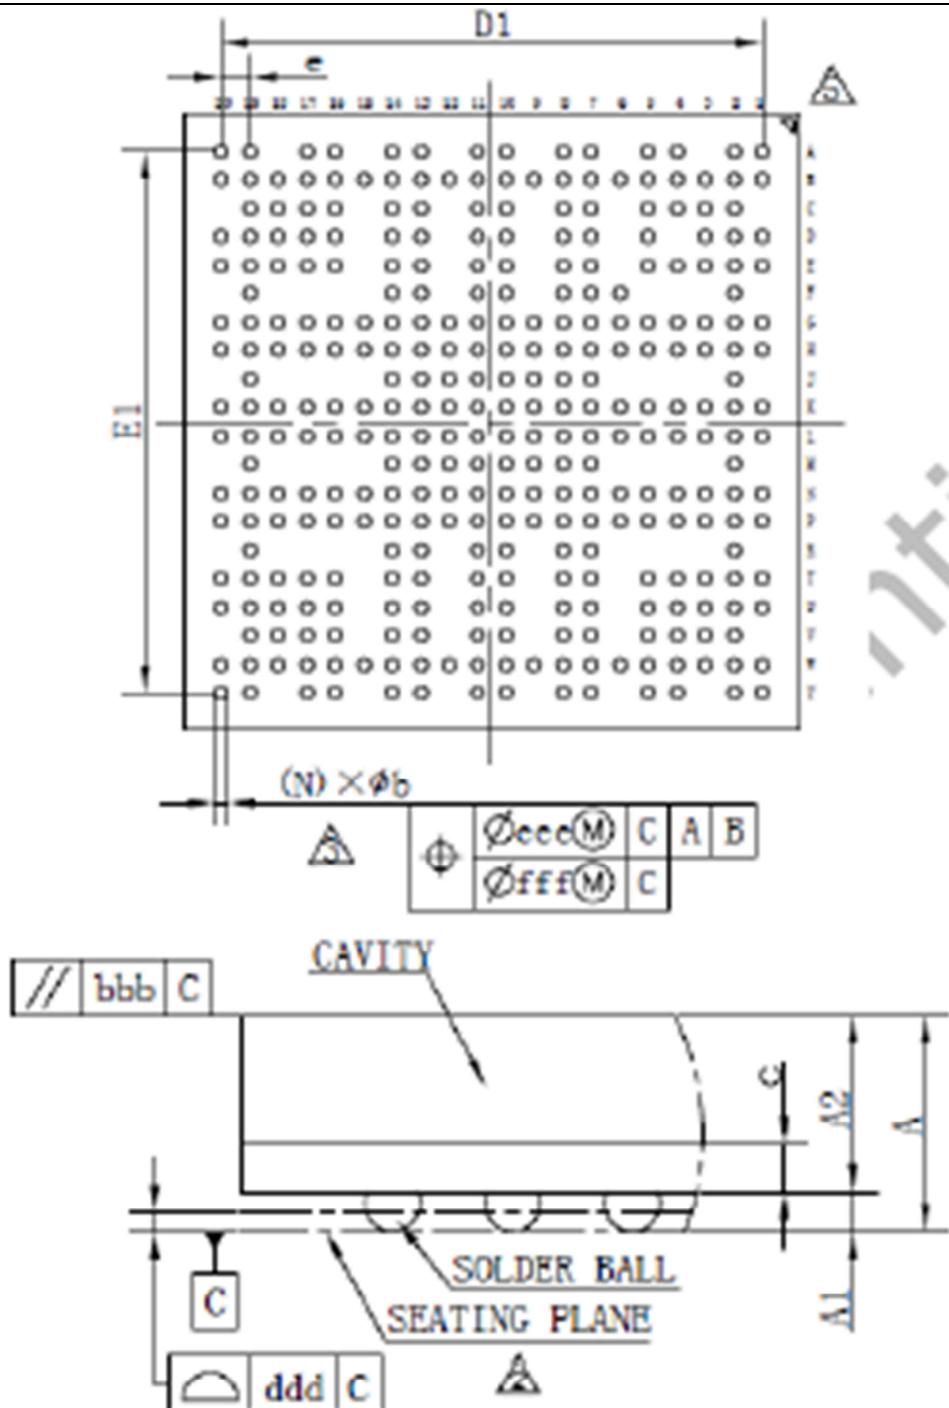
RK3228BBGA316 Package Top View and bottom view
